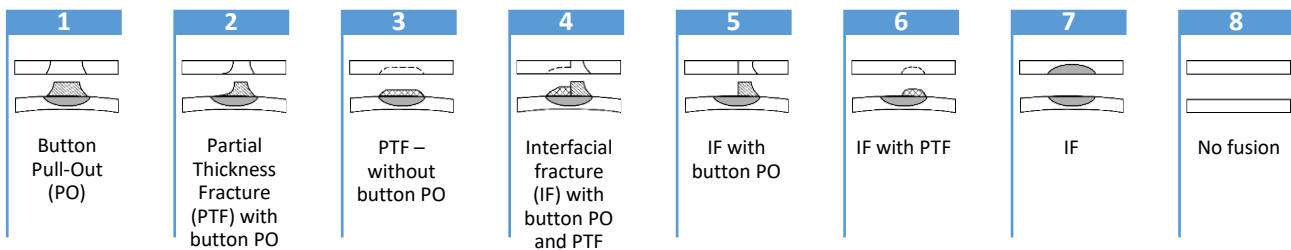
The different spot weld fracture modes identified by the AWS (2013)
